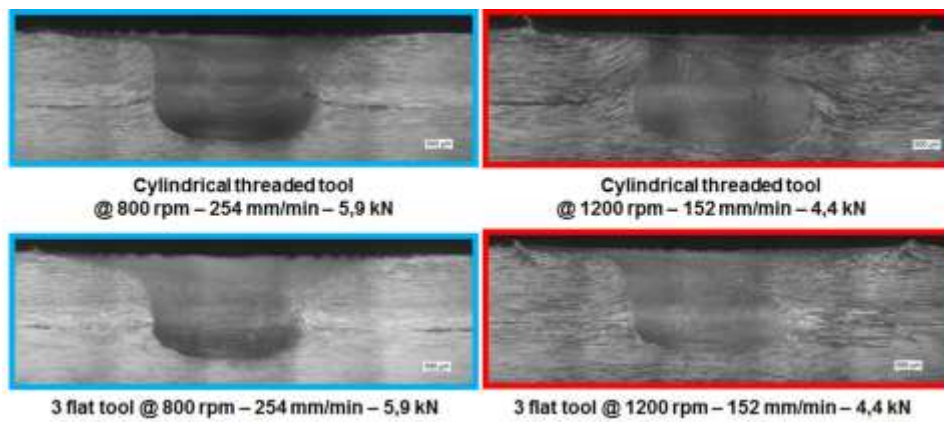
Macrosections of FSLW joints produced by the 2 different tool-probe designs and welding parameters with AA2198-T8 aluminium sheets [73].
